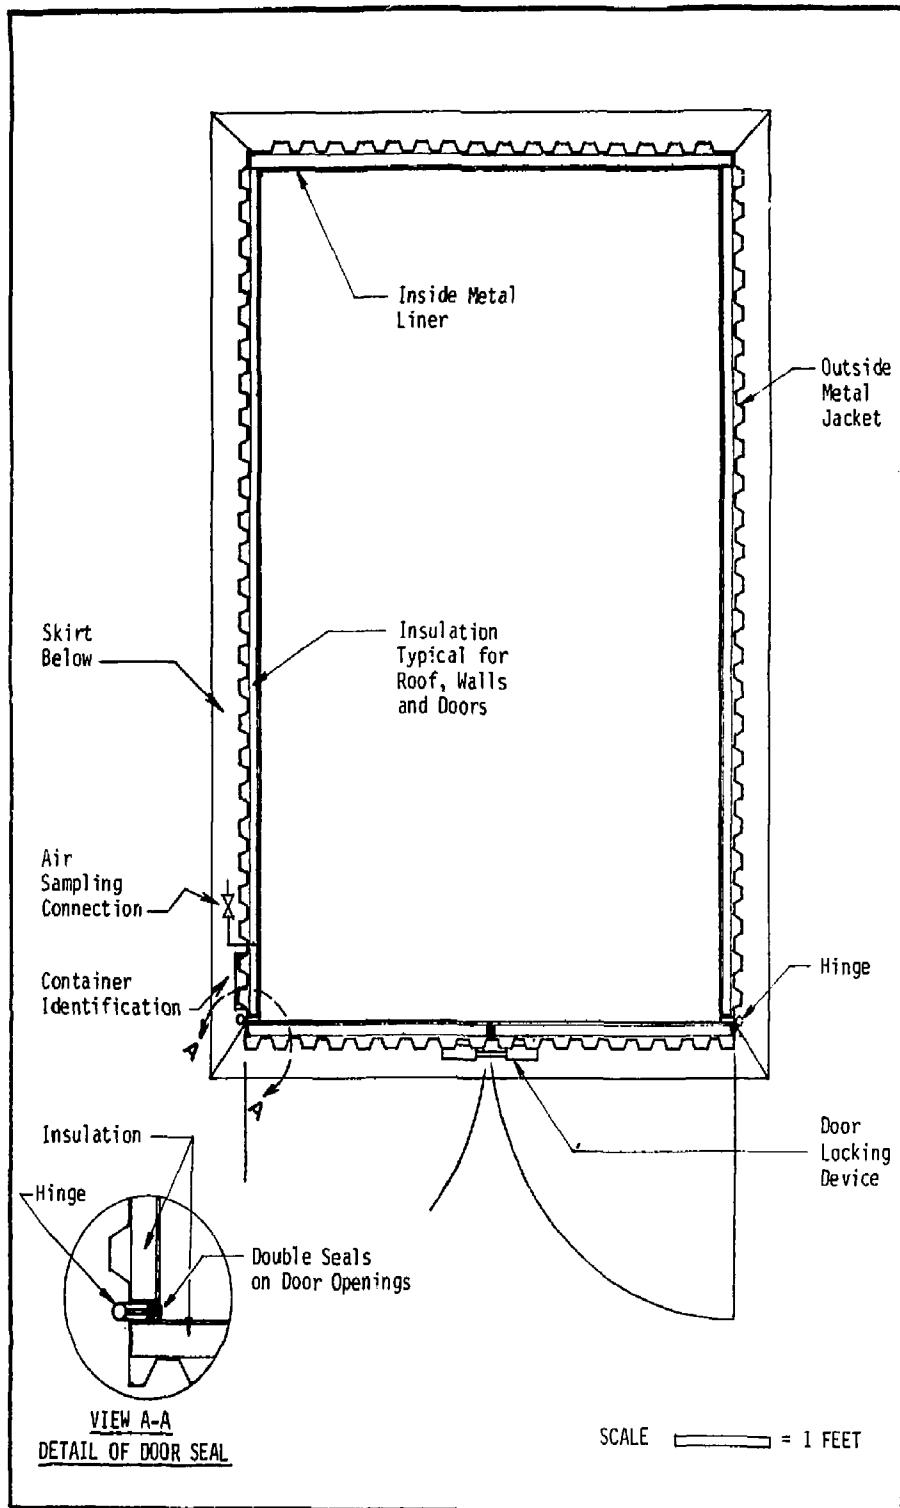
C OMNI CONTAINER SECTIONAL PLAN (II)
